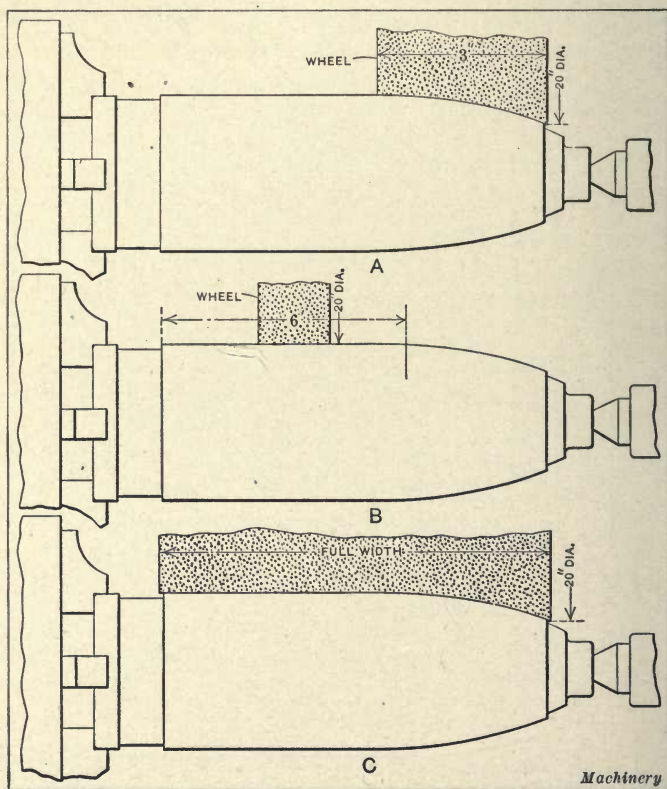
Diagram illustrating Method of finishing High-explosive Shells by grinding
